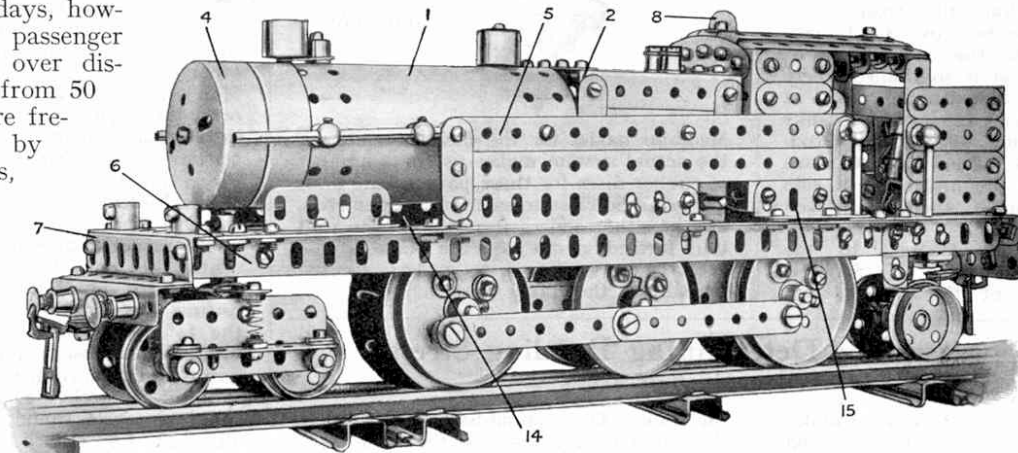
General view of the Meccano Clockwork-driven 4-6-2 Tank Locomotive
